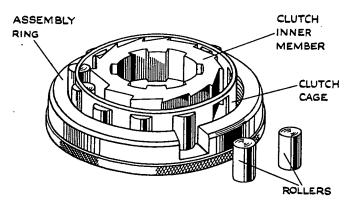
Assembly of uni-directional roller clutch in assembly ring Churchill L178
